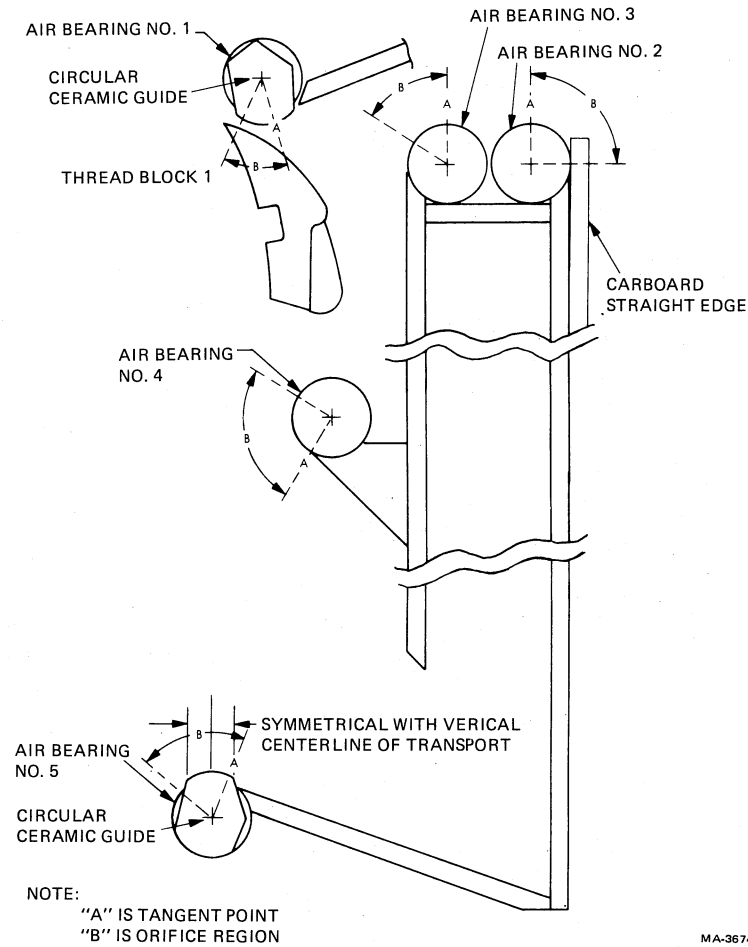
Air Bearing and Ceramic Guide Orientation
